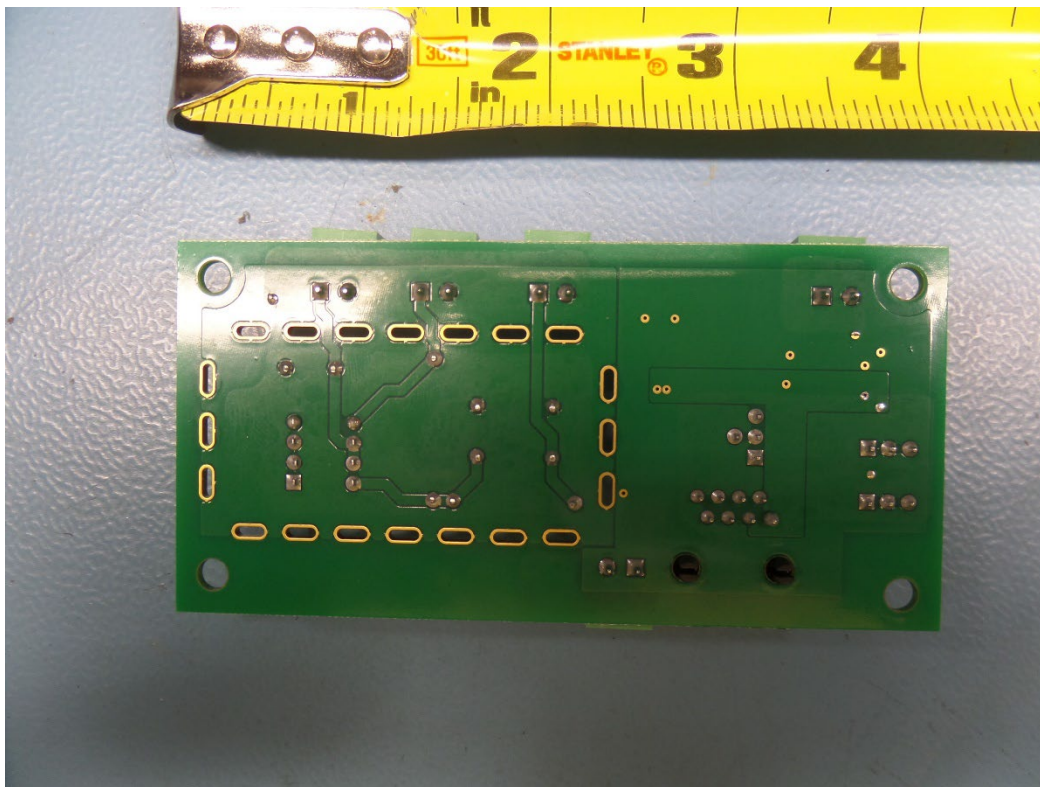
NG12 PRI/PAB RF PED, NP22 SAB RF PED SPLITTER BOARD BOTTOM SIDE
